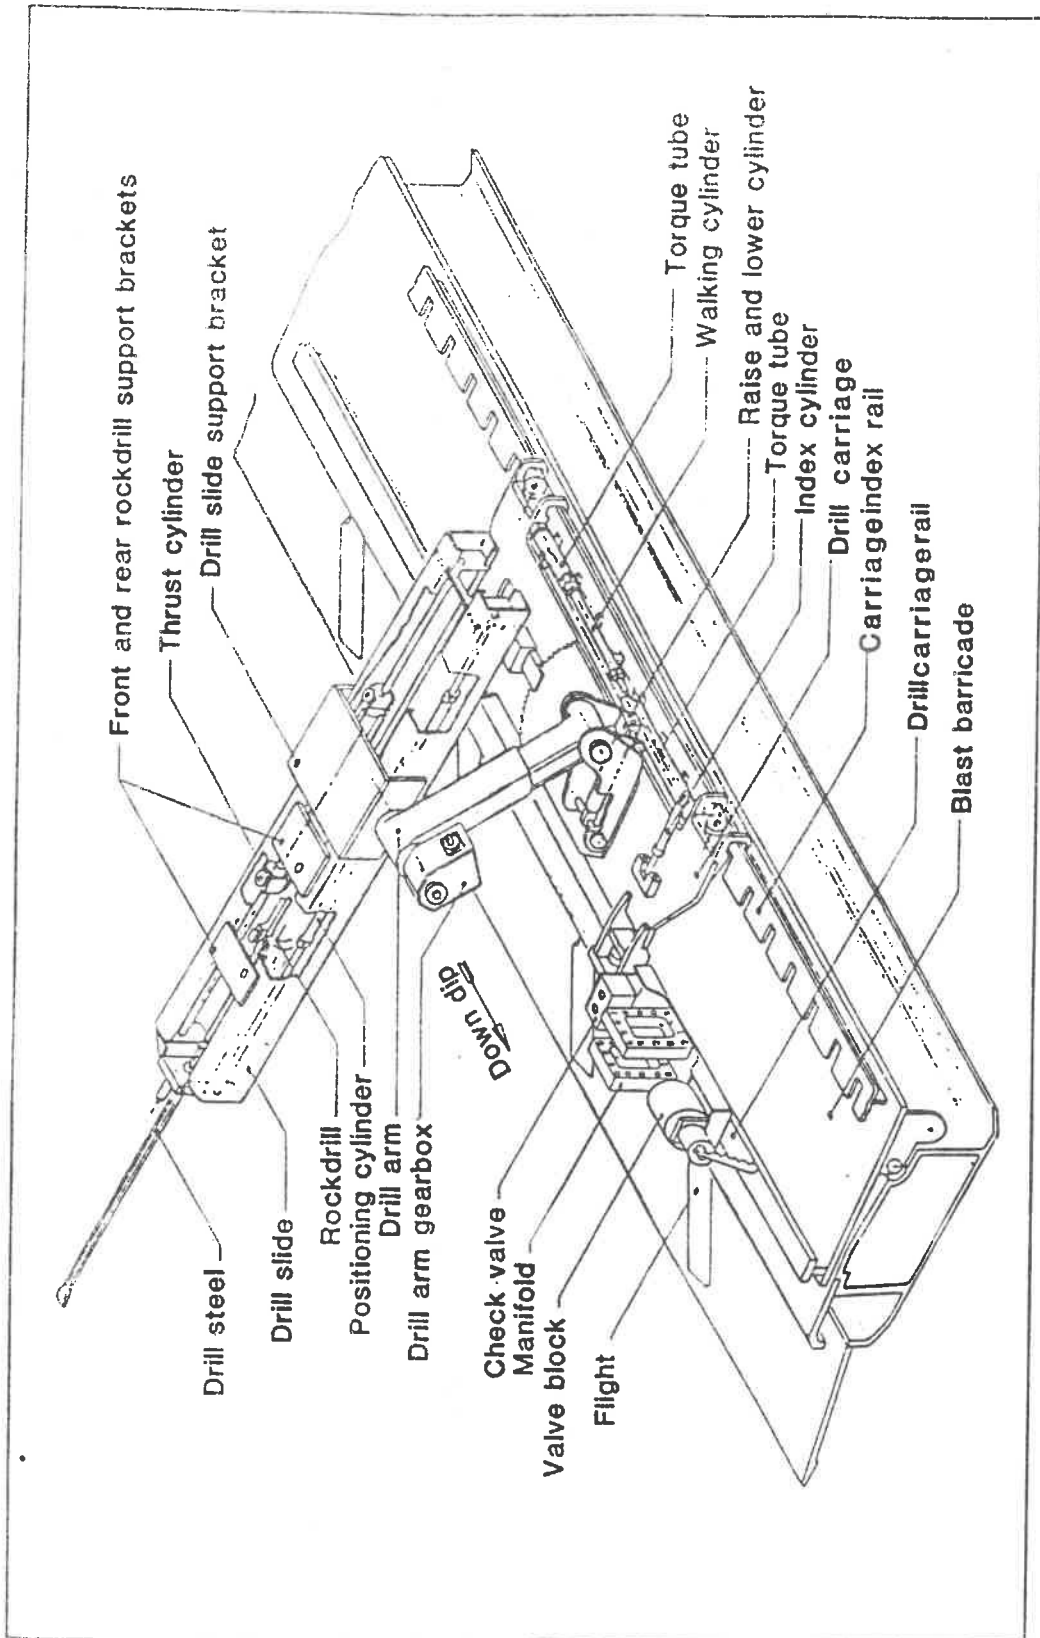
GENERAL ARRANGEMENT OF DRILL RIG ON LPRFC.
